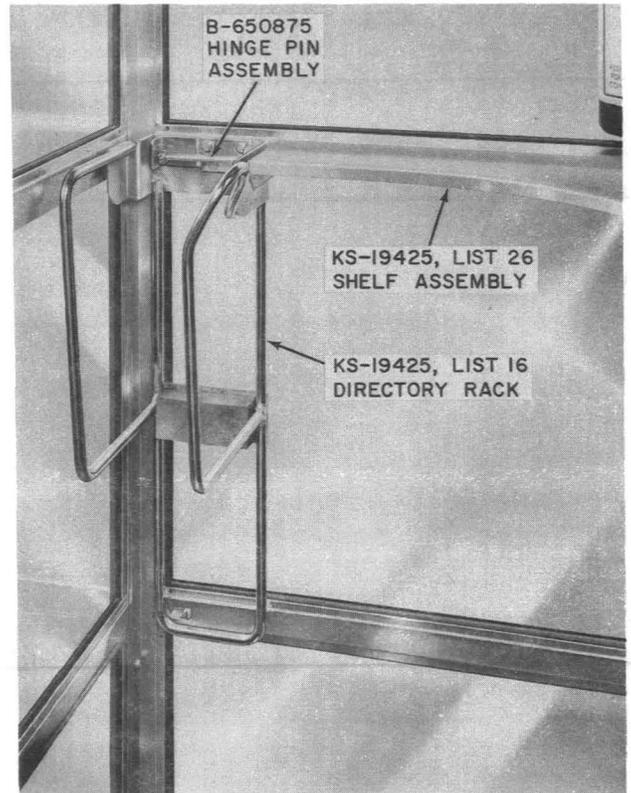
KS-19425, List 16 Directory Rack and KS-19425, List 26 Shelf Assembly
